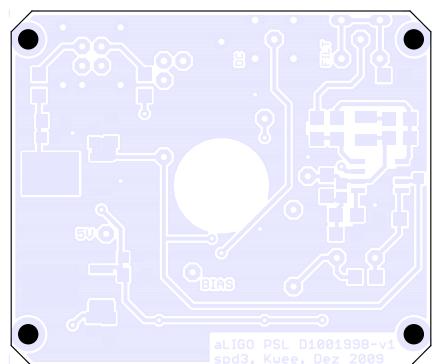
Board bottom view showing drills with 2.7 mm (0.106 in) diameter
